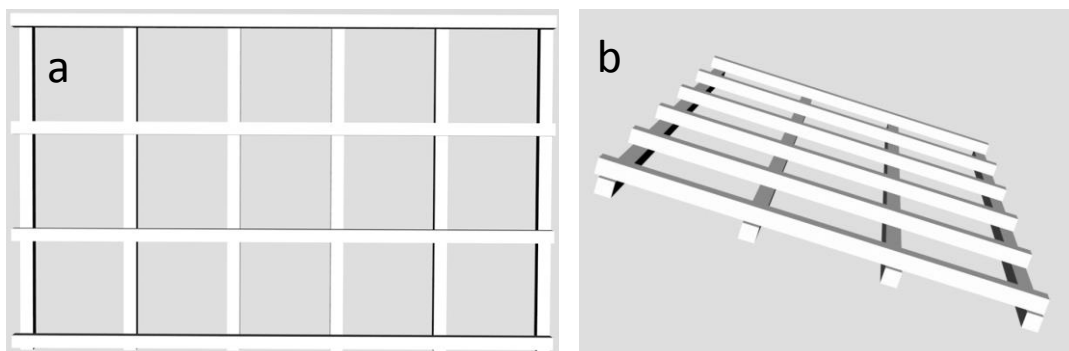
CAD design of the samples. a) top view of the design b) side view of the design.
